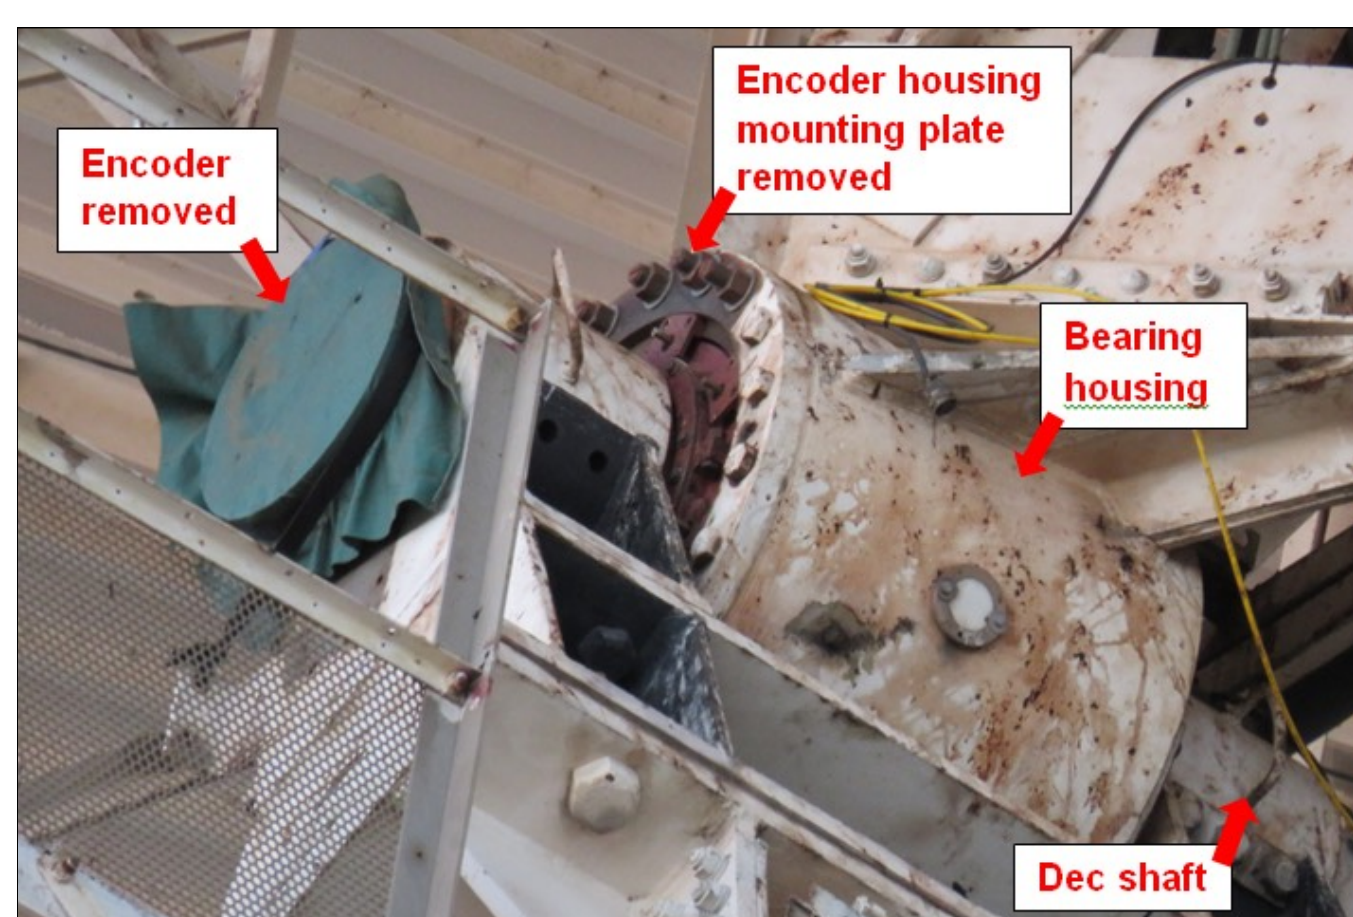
HartRAO 26m west end of Dec shaft with encoder removed. Credit: J. Grobler.
